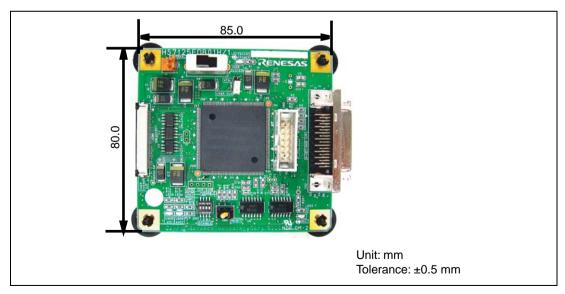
External Dimensions of the Main Unit of the Debugging MCU Board
